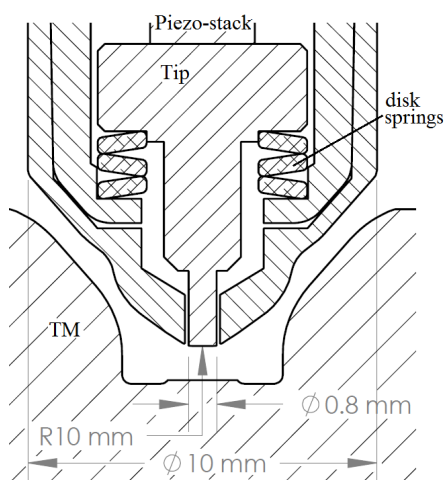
Cut view of the GPRM and TM recess (courtesy of RUAG Schweiz AG, RUAG Space)
